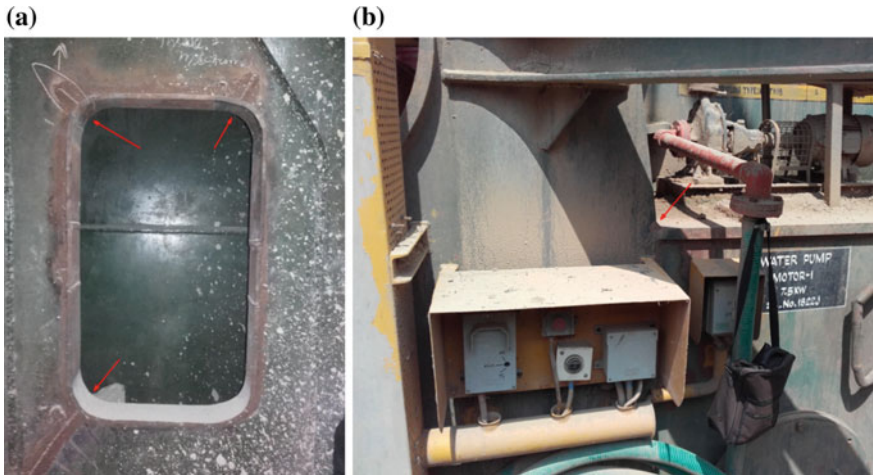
Examples of damage to slewing platforms of surface mining machines: a fractures in the platform diaphragm; b fracture in the connection between the pylon and the slewing platform
